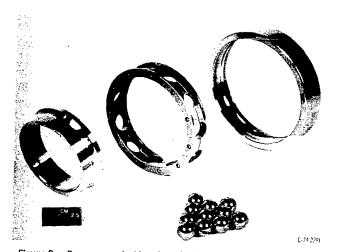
Deep-groove test bearing with inner race shoulder removed; two-piece machined cage construction.
